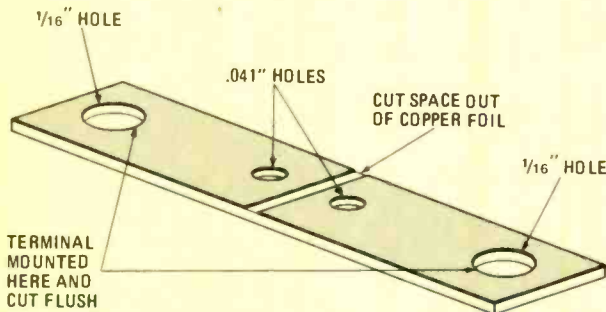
LED MOUNTING STRIP made from a small piece of single-sided printed-circuit board. Mini-terminals fit the outer holes.
